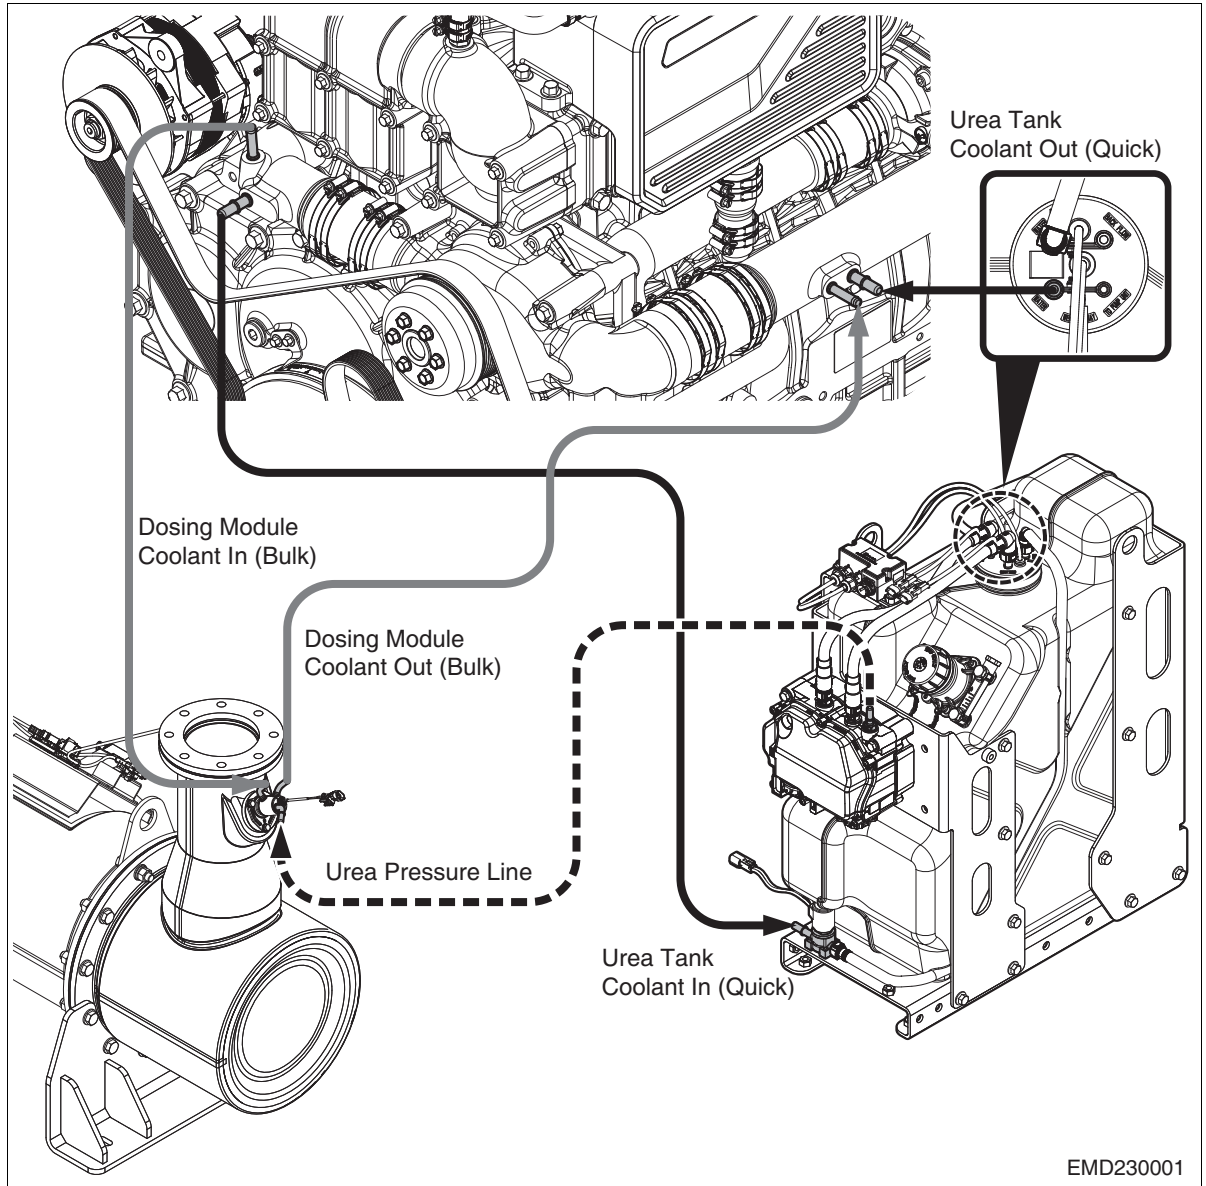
Urea Tank heating & Dosing Module cooling Hose connection (DX12)
